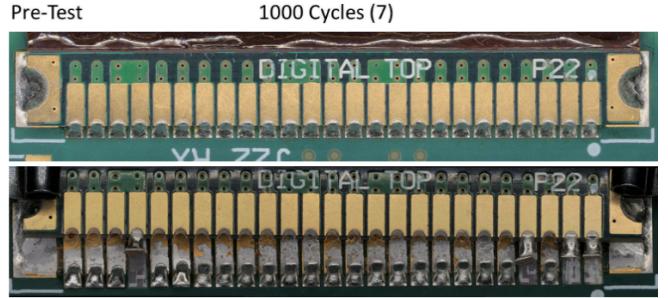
Top views of a flex cable connected to the PCB with castellated via solder joints, before (top) and after (bottom) shear testing. This unit was tested after 1000 cycles. Sample ID is shown in parenthesis.
